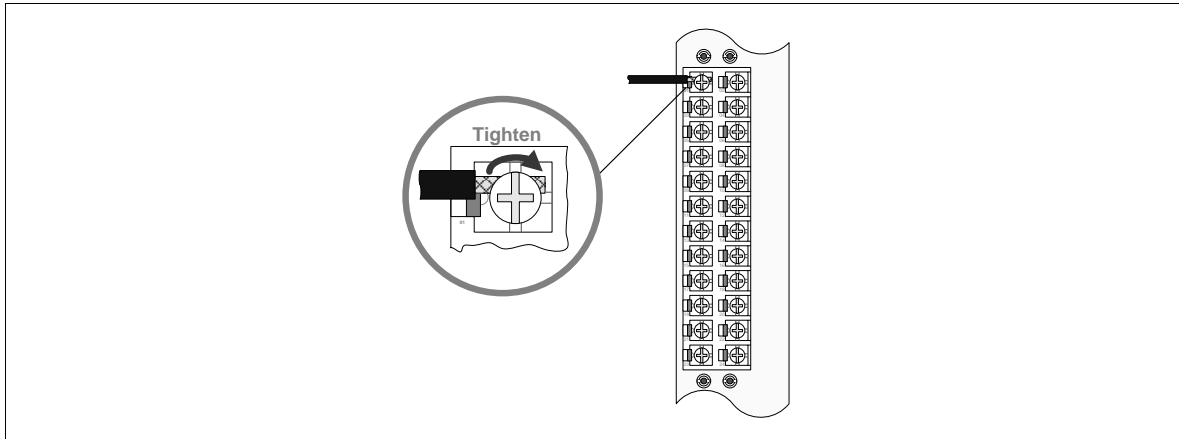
Glancing demo about the wiring for electrical cables
